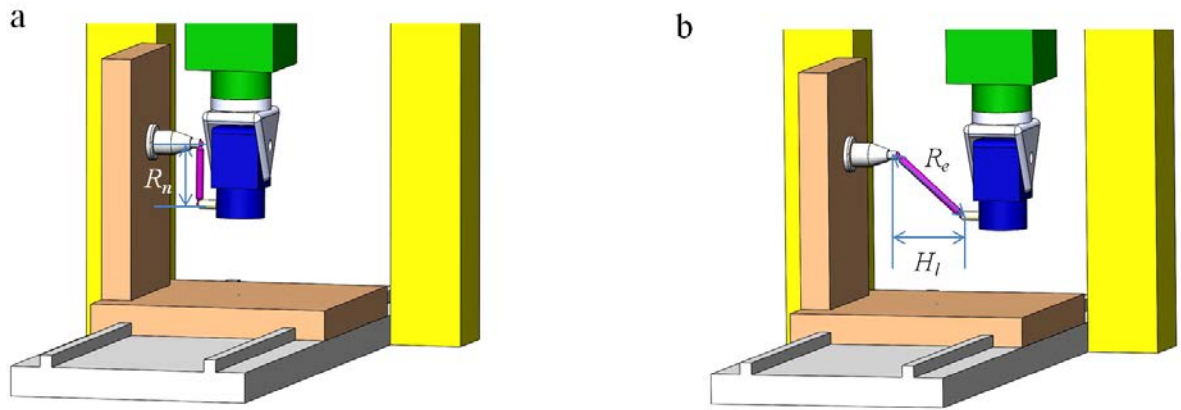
the A-axis tests for a tilting head 5-axis machine tools.
